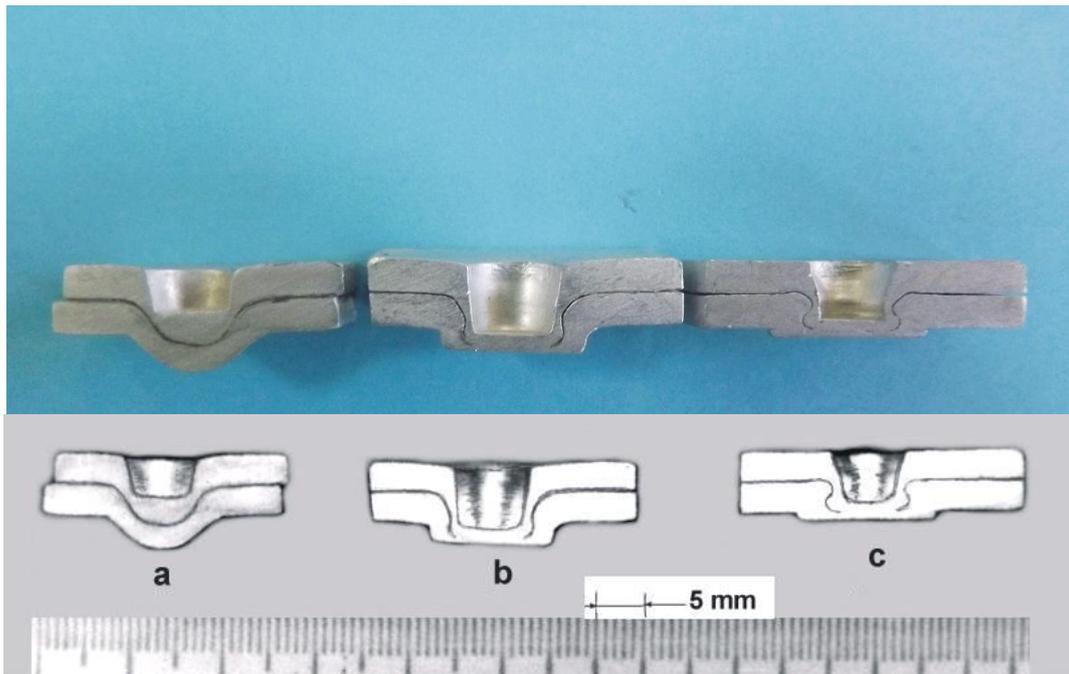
Macroscopic aspect of specimens after execution stages: a – free embossing; b – welding + riveting; c – flattening
